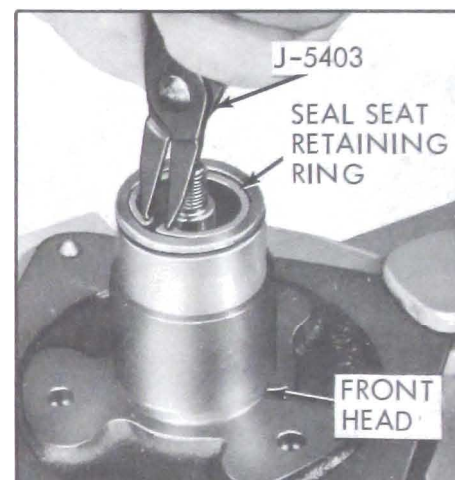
Removing Shaft Seal Seat Retaining Ring
